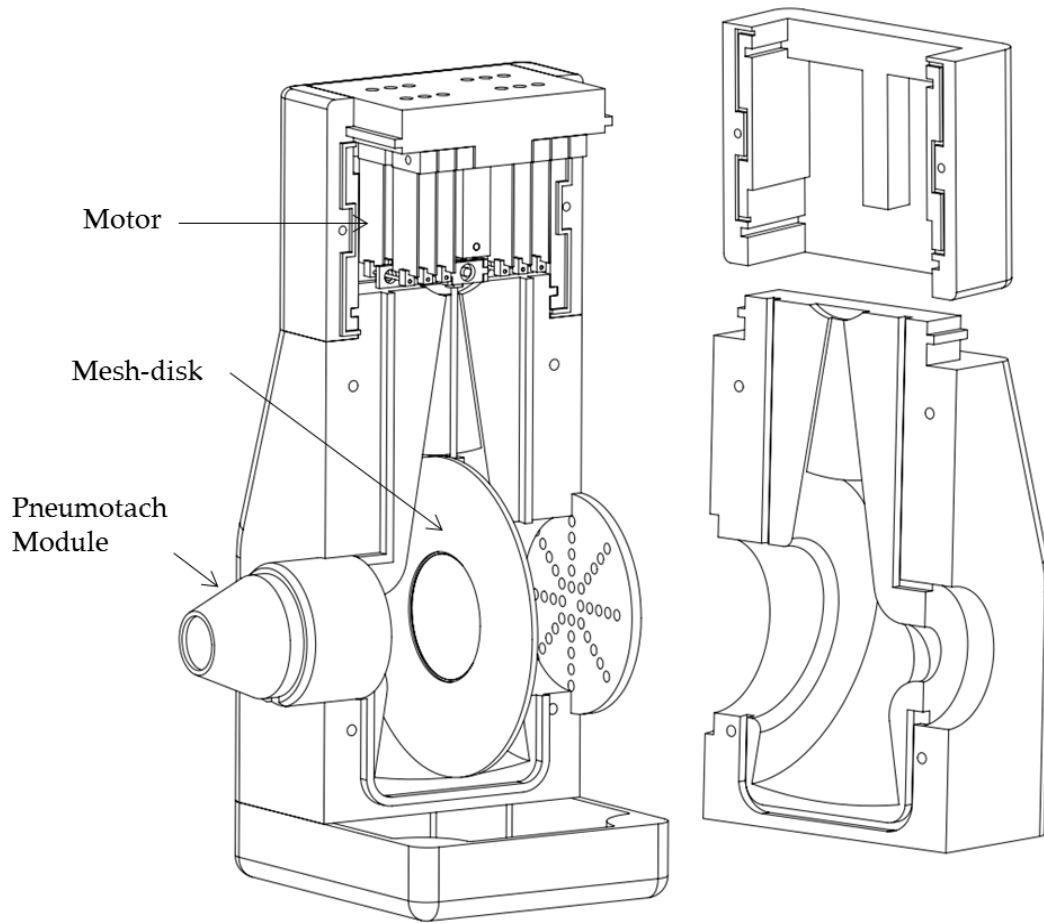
Isometric of the assembled 3D model of the Multiple Actuator Prototype.
